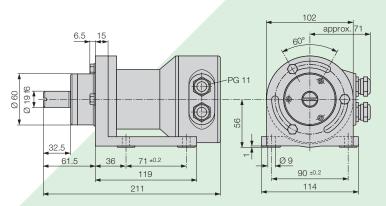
KINAX WT 707 with additional gear, screw terminals, cable glands and foot.
